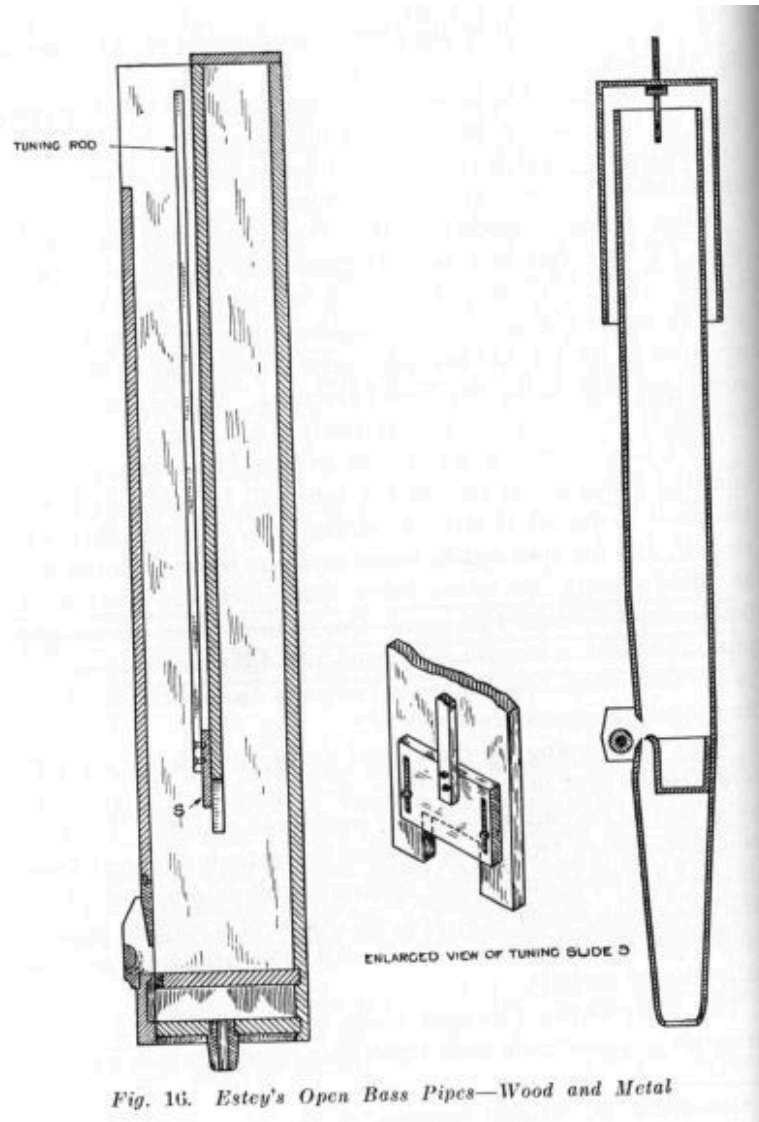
Estey's Open Bass Pipes—Wood and Metal
